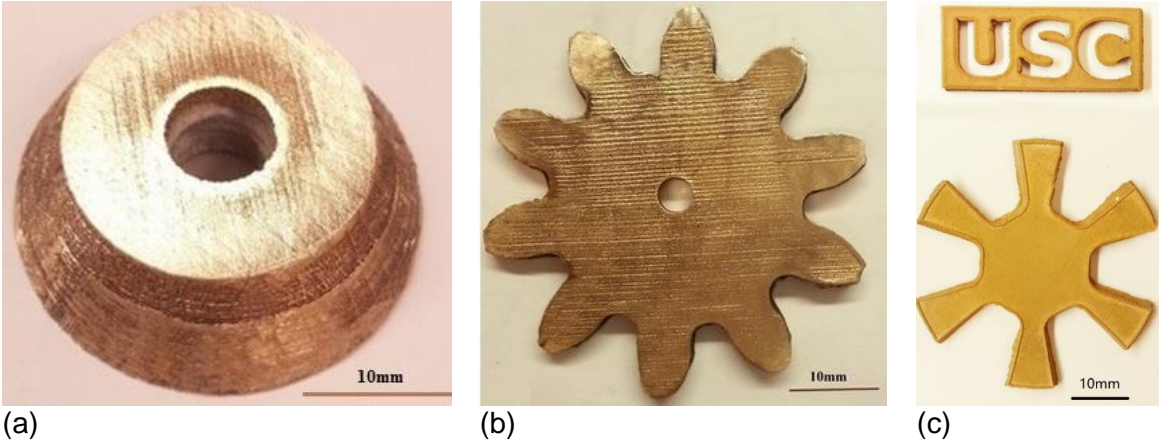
SSS printed bronze parts a: Half cone b: Gear c: USC tag and turbine top
